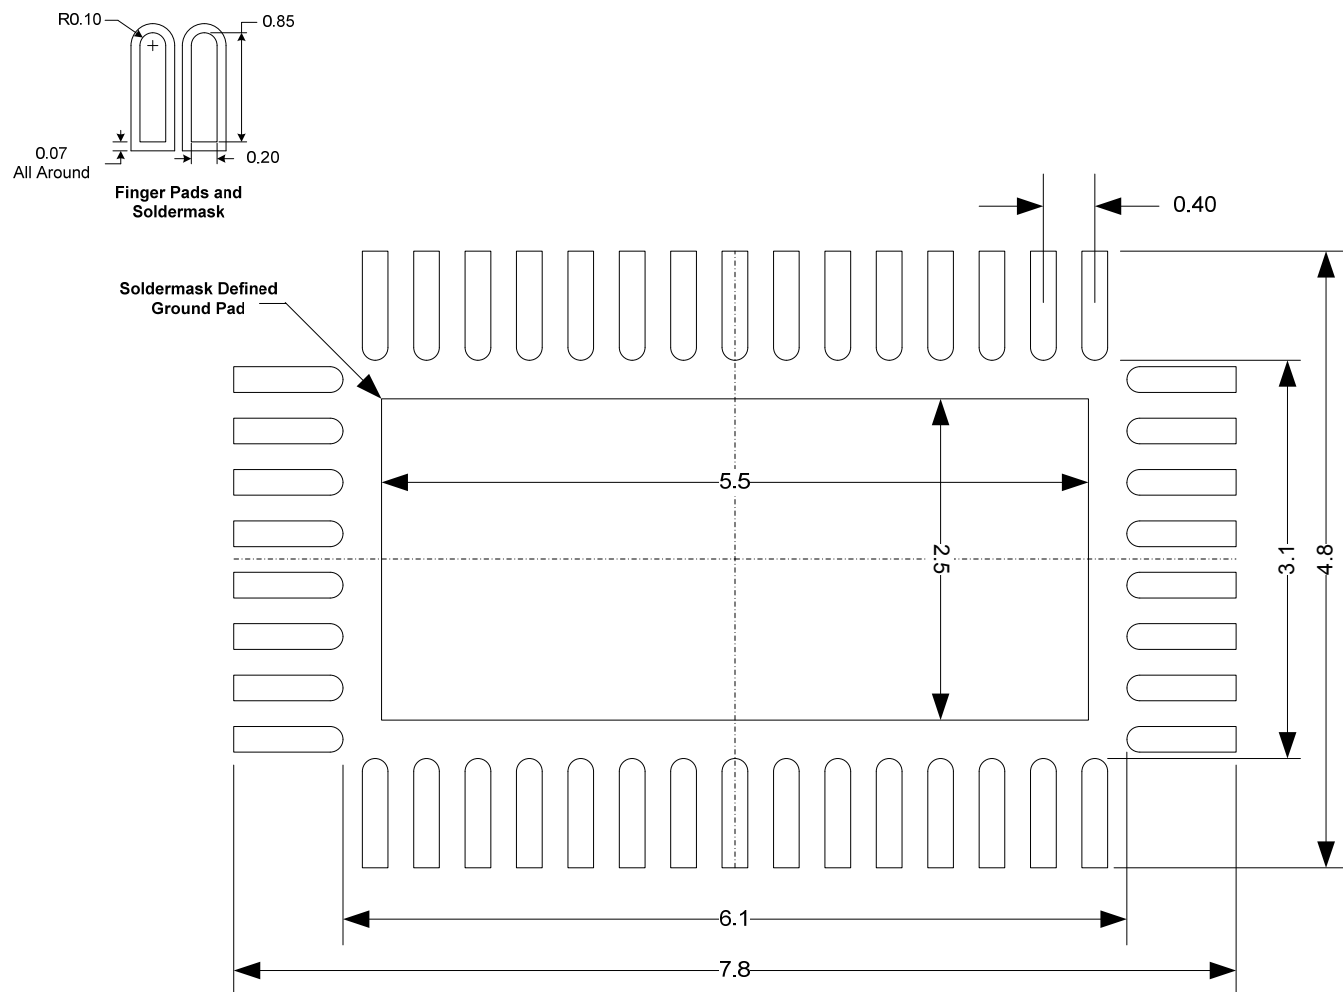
RECOMMENDED SOLDER PAD LAYOUT
